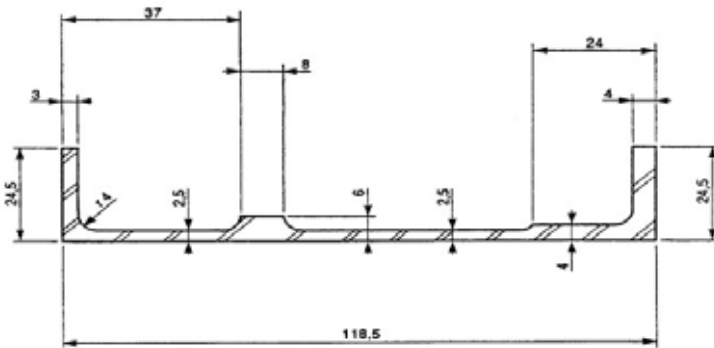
Transversal section of the bended frame (dimensions are in mm)
